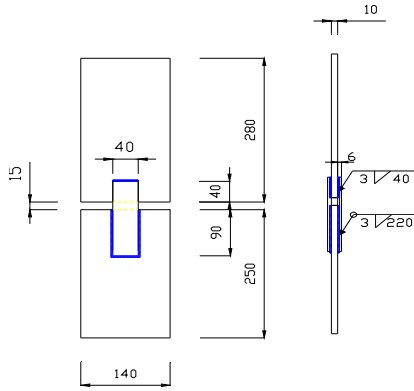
Geometry of specimen for SALTFW40(Unit : mm)
